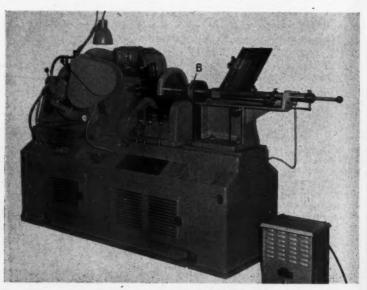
Dutch-built Gefra type VM-1 fully- automatic twist drill milling machine
